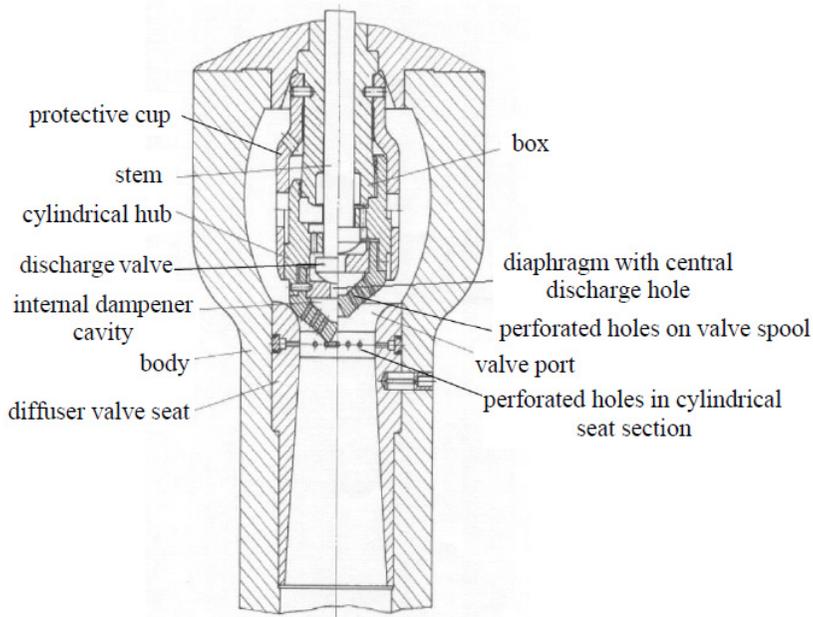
Balanced control valve with perforated enveloping surfaces of the spool and seat inlet section.
